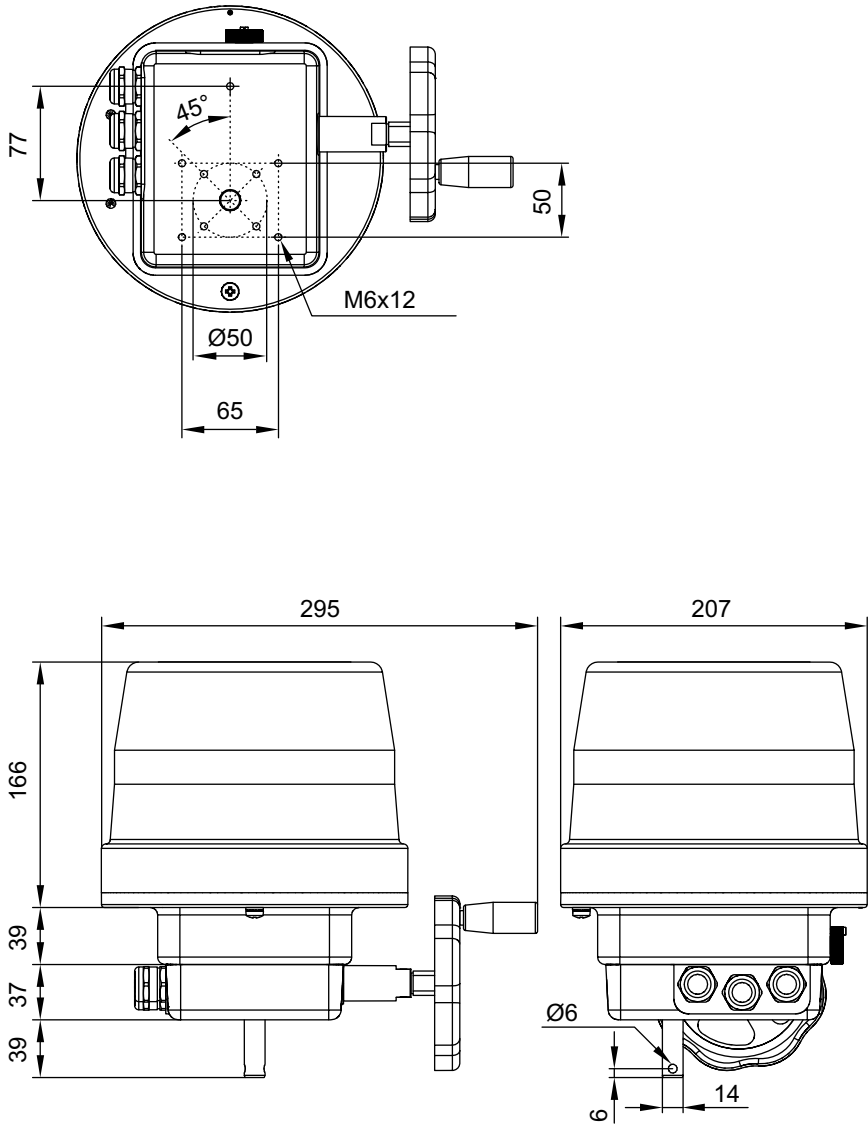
Series NEx1 to NEx4 A – assembly dimensions
